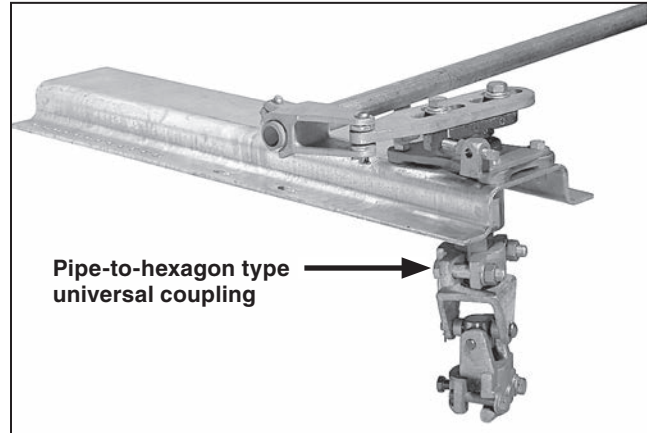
Typical outboard bearing configuration, upright mounted outboard of switch pole units.
